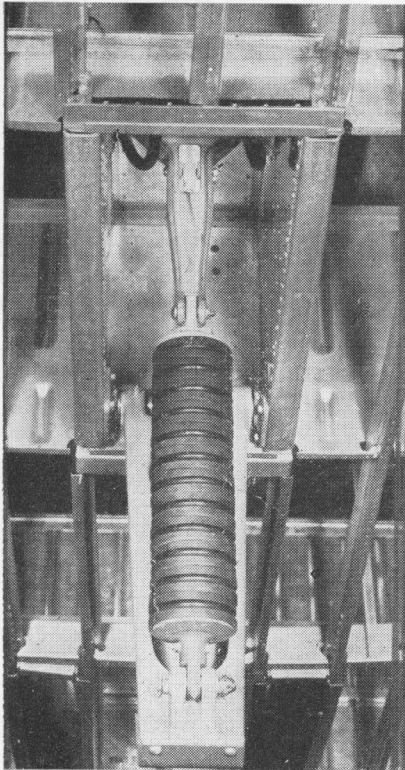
Seen here are the retractable tail skid and the manner of mounting. The skid is not intended to take full tail landing loads but is designed to withstand the rocking load after landing.
